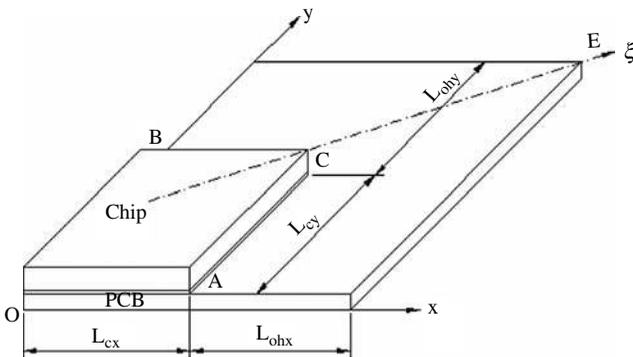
Die substrate assembly with overhang PCB (COB assembly)
